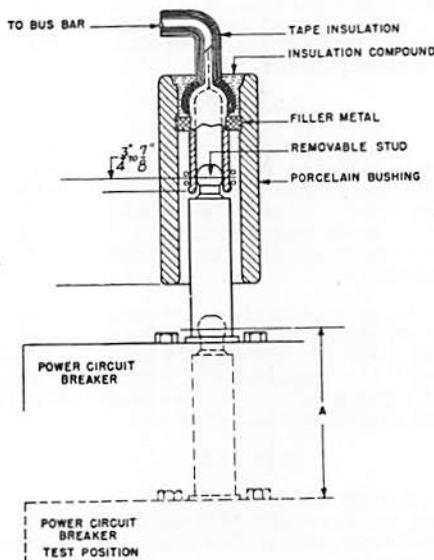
Measurement of Adjustment of Primary Disconnecting Devices
